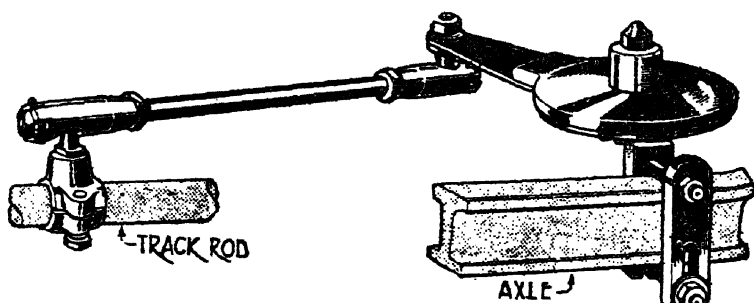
The F.E.W. Damping Device for Preventing Wheel Wobble..
